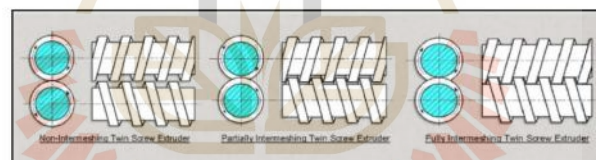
The amount of overlap between the screws in the twin-screw extruder [6]
